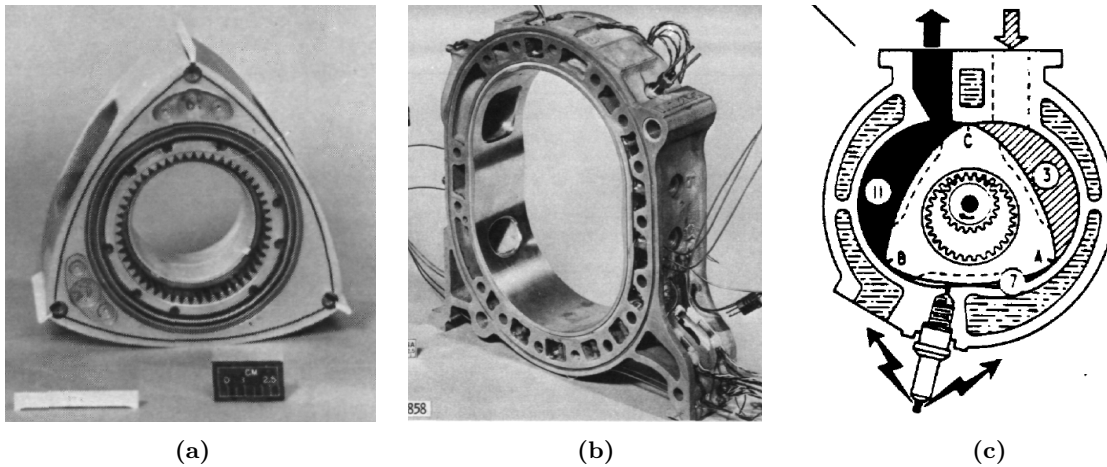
Wankel-type rotary engine (a) rotor and (b) casing [62], and (c) cross-sectional schematic drawing [63].
